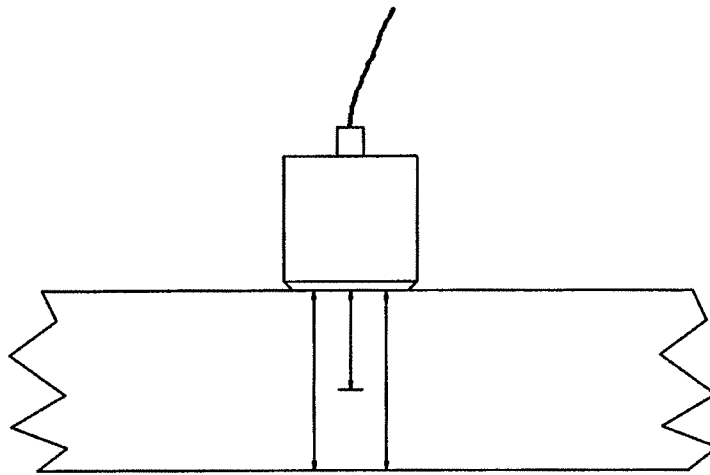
(c) Thickness gauge on corroded plate.
